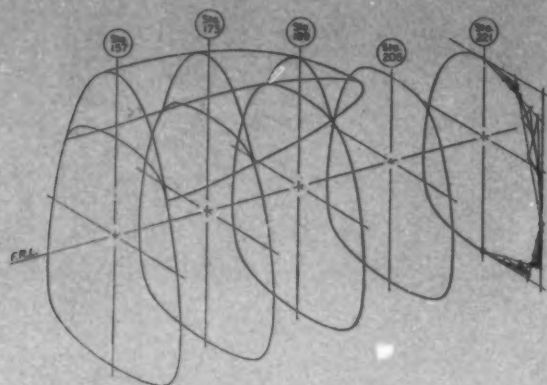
Perspective drawing of master lines gives basic lines for all later drawings
